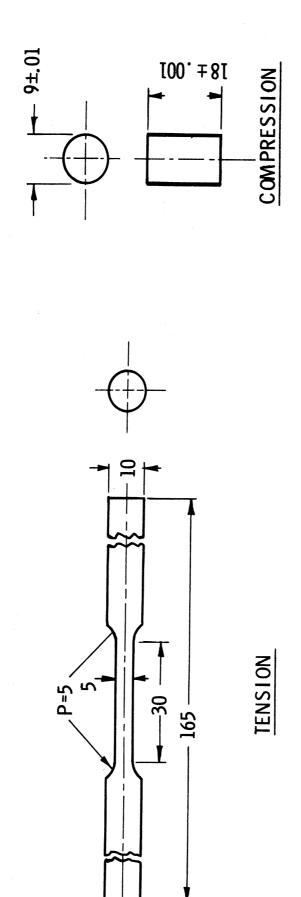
Dimensions of test specimens. All sizes are given in mm (millimeters).
